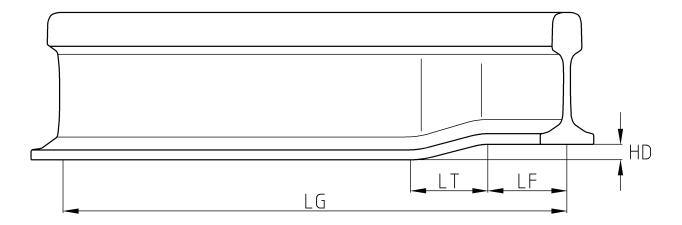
Geometry and dimension testing of the forged vignole rail
